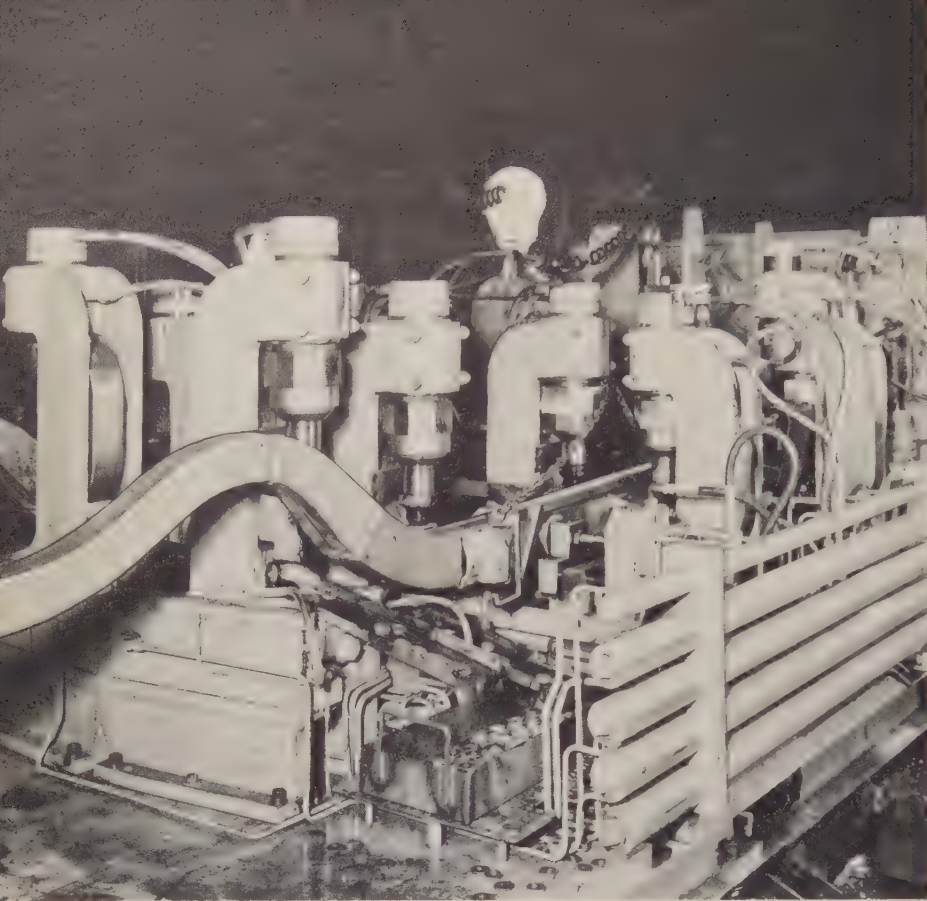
All holes are pierced in body brackets at the same time by hydraulically operated "C"-type equalizing guns accurately located on a specially designed piercing fixture. The frame is rigidly mounted in locators positioned between the "C"-type guns.
